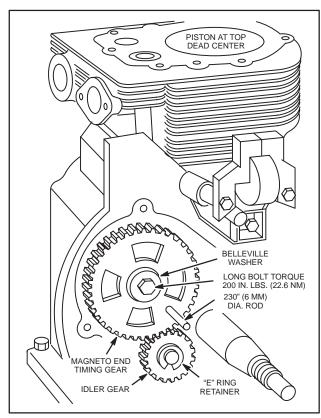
INSTALLING AND TIMING MAGNETO DRIVE GEAR
